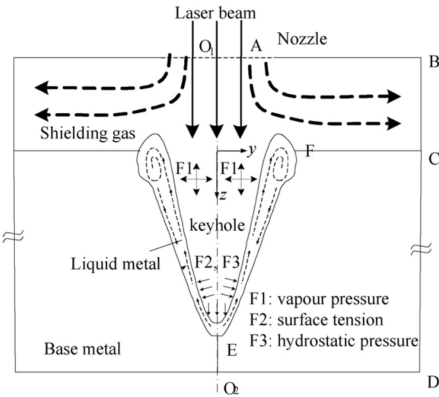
Cross sectional sketch of keyhole mode in laser welding [192].
